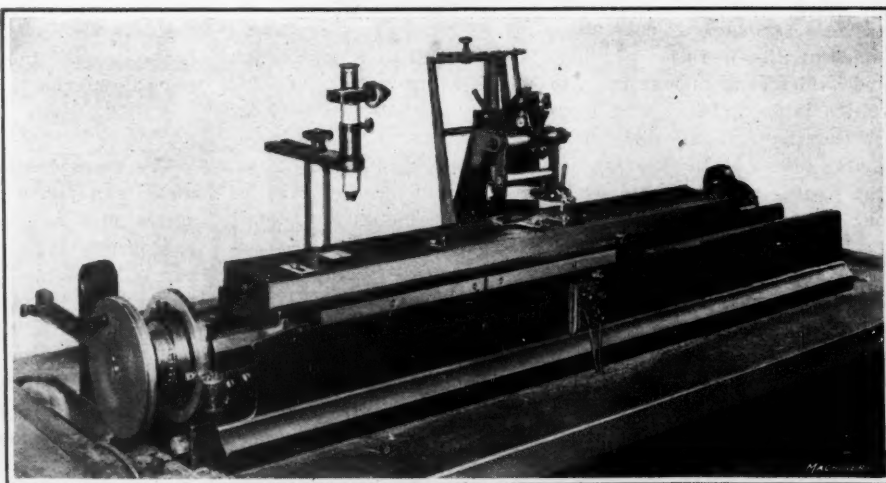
Power-driven Linear Dividing Engine or Graduating Machine similar in Design to Machine shown in Fig. 1
